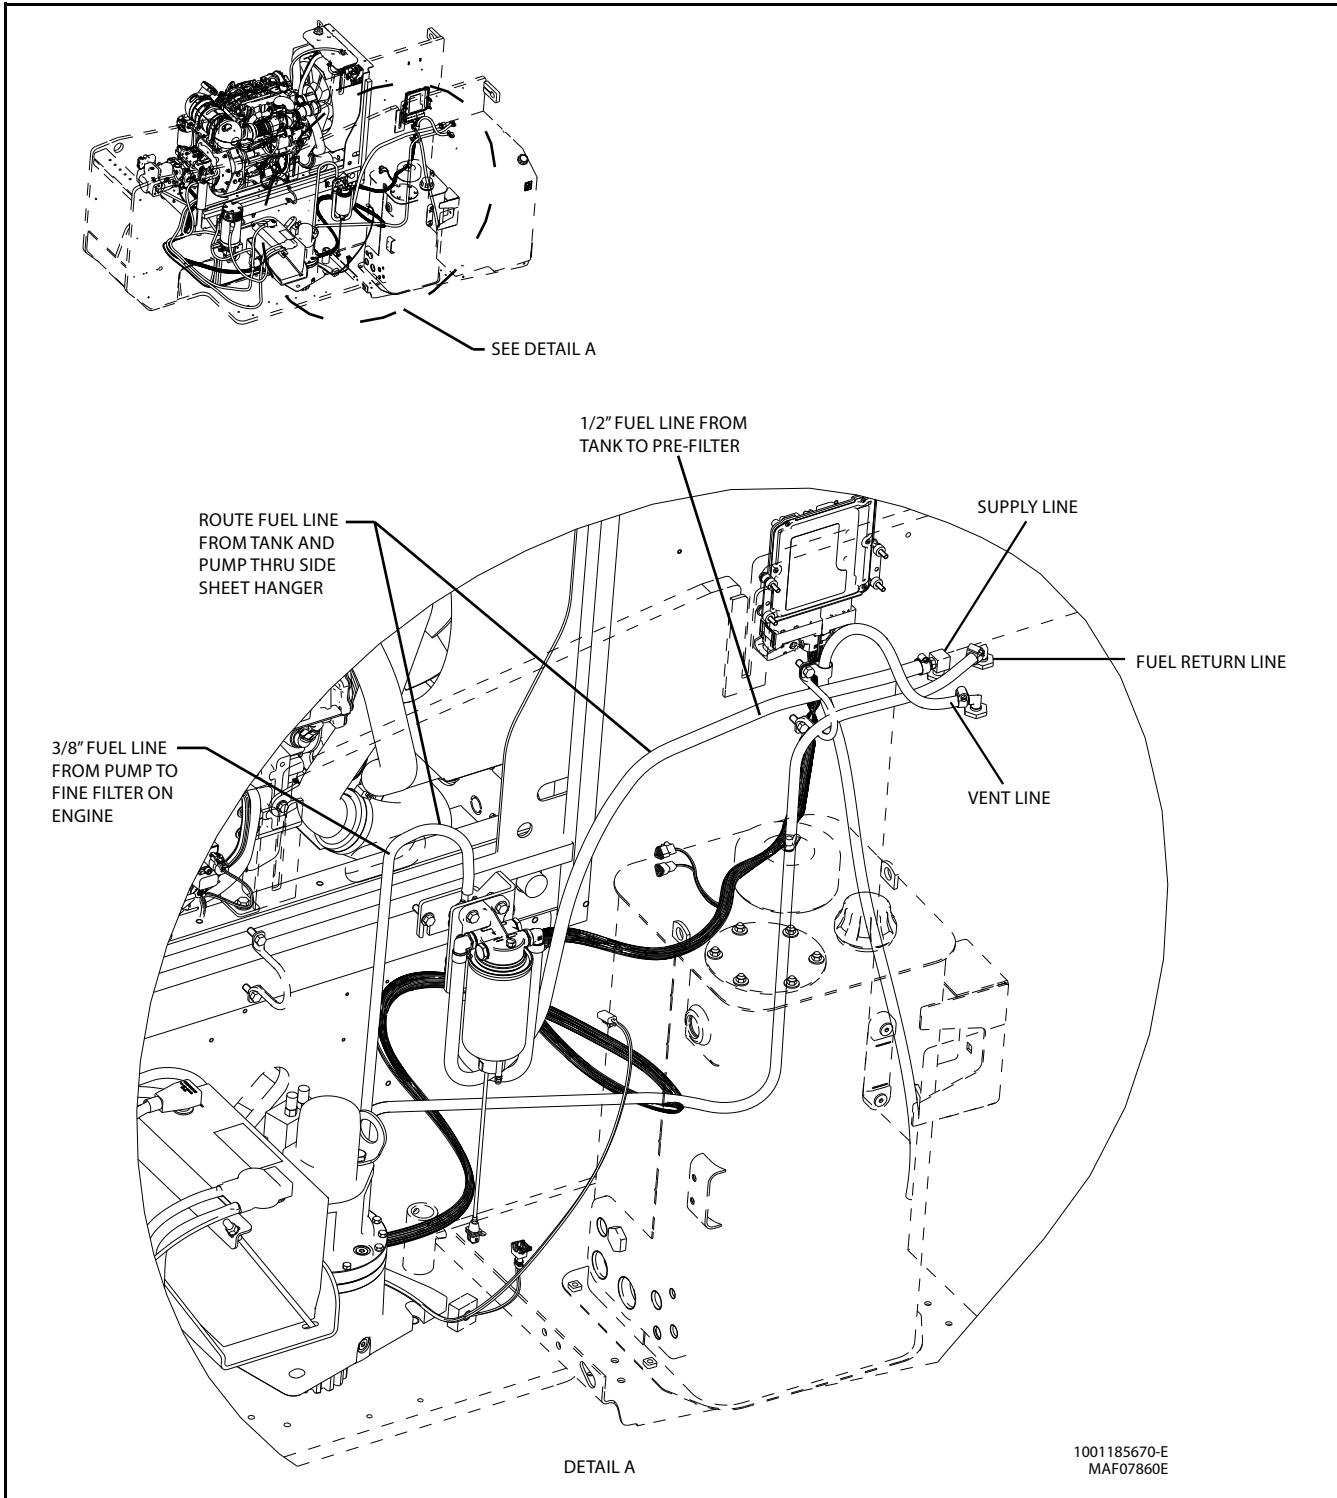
Deutz TD2.9L4 Engine Installation - Sheet 1 of 8
